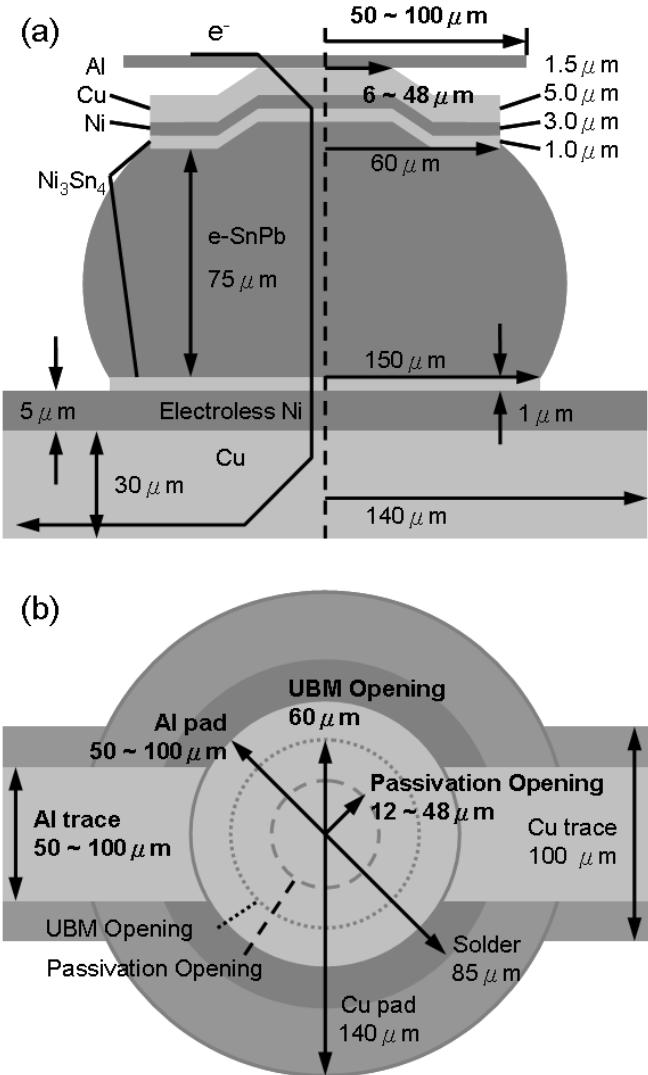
The schematic models for the solder joint: (a) the cross-sectional view (b) the plane view
